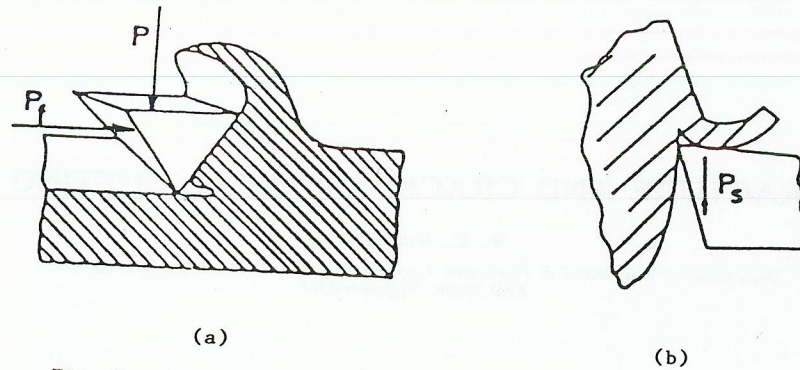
Two erroneous models that appeared recently, one for (a) abrasive machining and the other for (b) turning. Both show cracks ahead of the tool.
